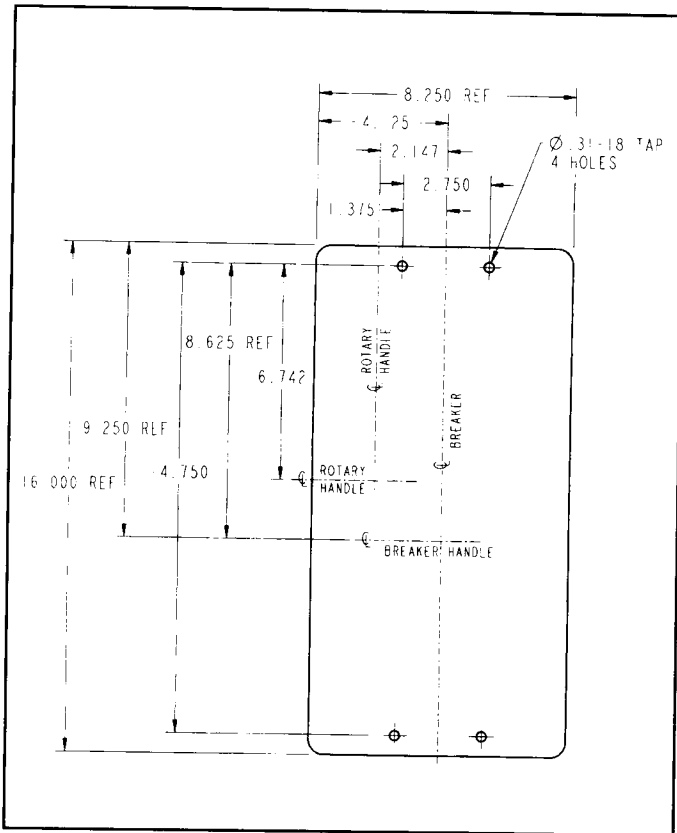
Drill & Tapping Plan for N-Frame Breaker
